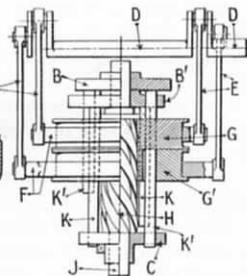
CAMSHAFT ASSEMBLY IN PLAN.
